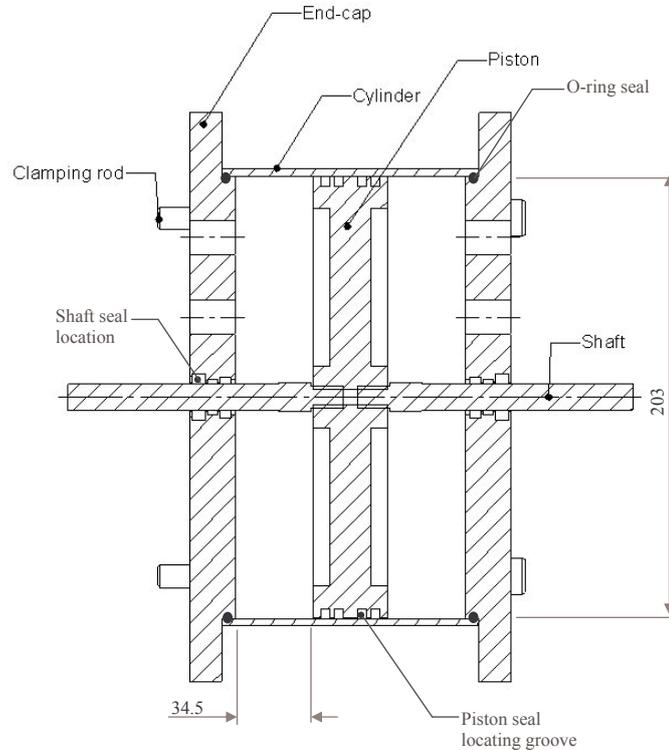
Cross-section of device showing the cylinder, piston, shaft, end-cap, and clamping rod. The clamping rods pass around the outside of the device cylinder.
